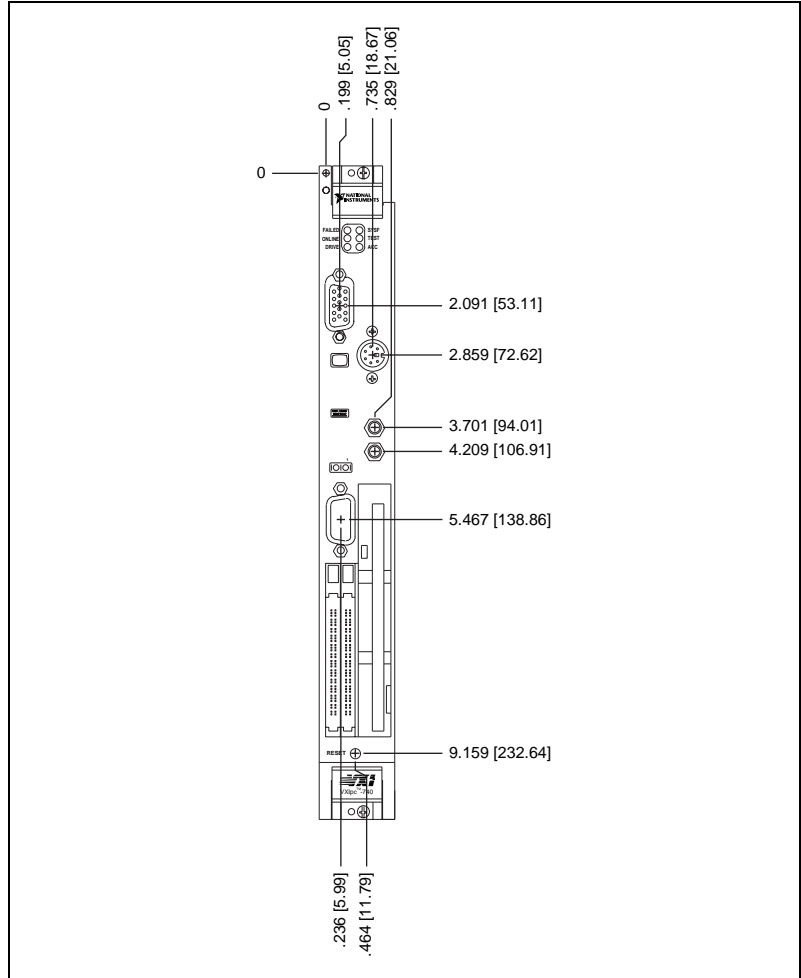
VXIpc-740 Front Panel Layout and Dimensions
